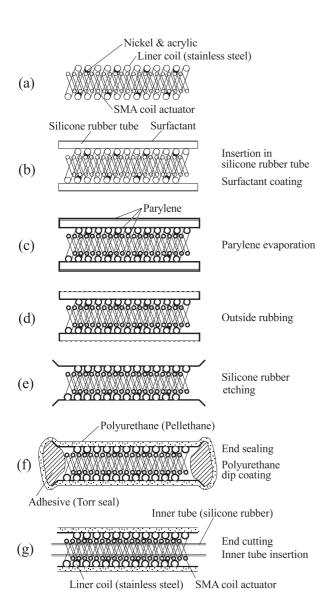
Fabrication of polyurethane outer tube on active mechanism (torsional mechanism is exampled)
